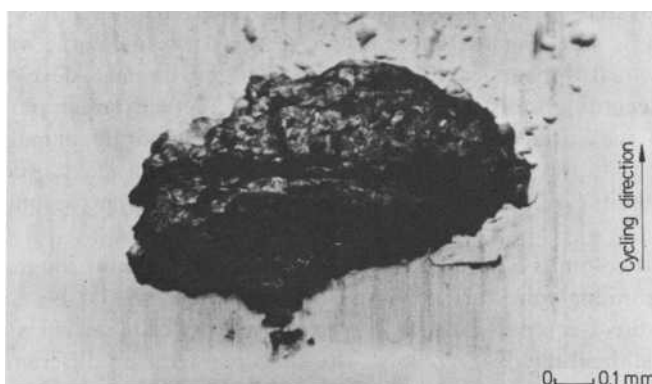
Typical pitting caused by a damaged surface area. The pitting enlarges in the cycling direction to form a V.
